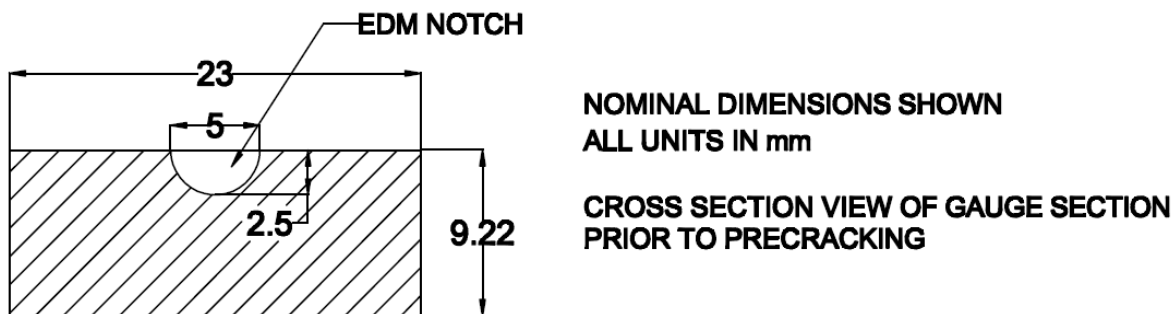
Surface crack specimen gauge section – cross-section view
